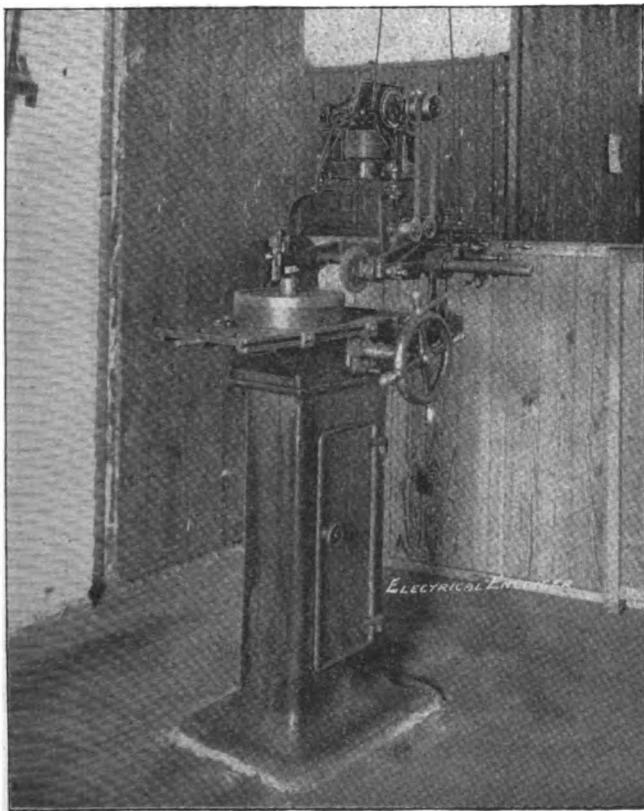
ELECTRIC SURFACE GRINDING MACHINE.
